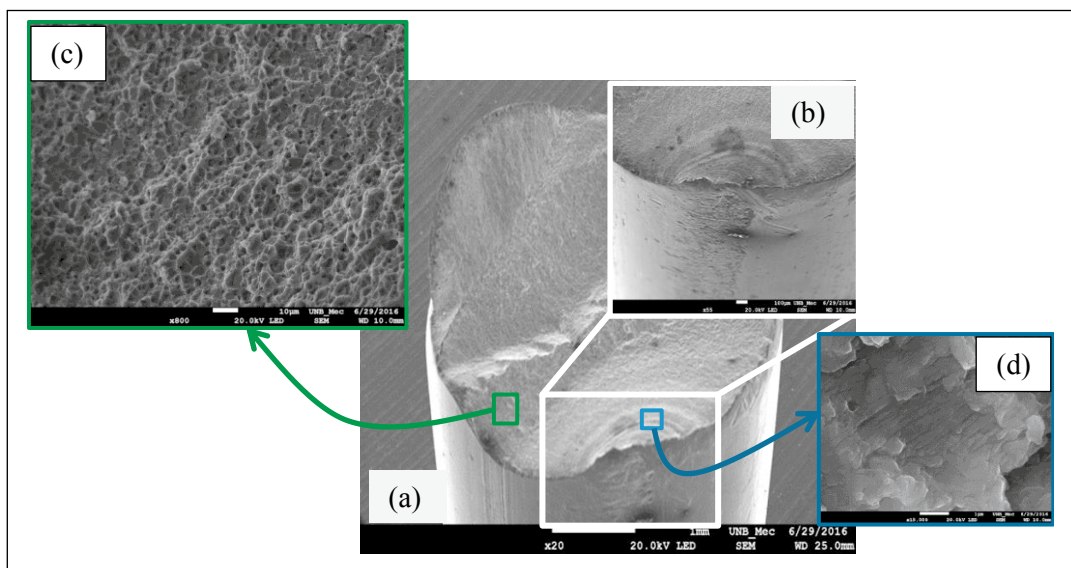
Fracture surface of an AAAC 900 MCM strand: (a) crack initiated in the fretted region and beach marks; (b) zoom of the crack initiation point; (c) dimples; and (d) striation mark.
